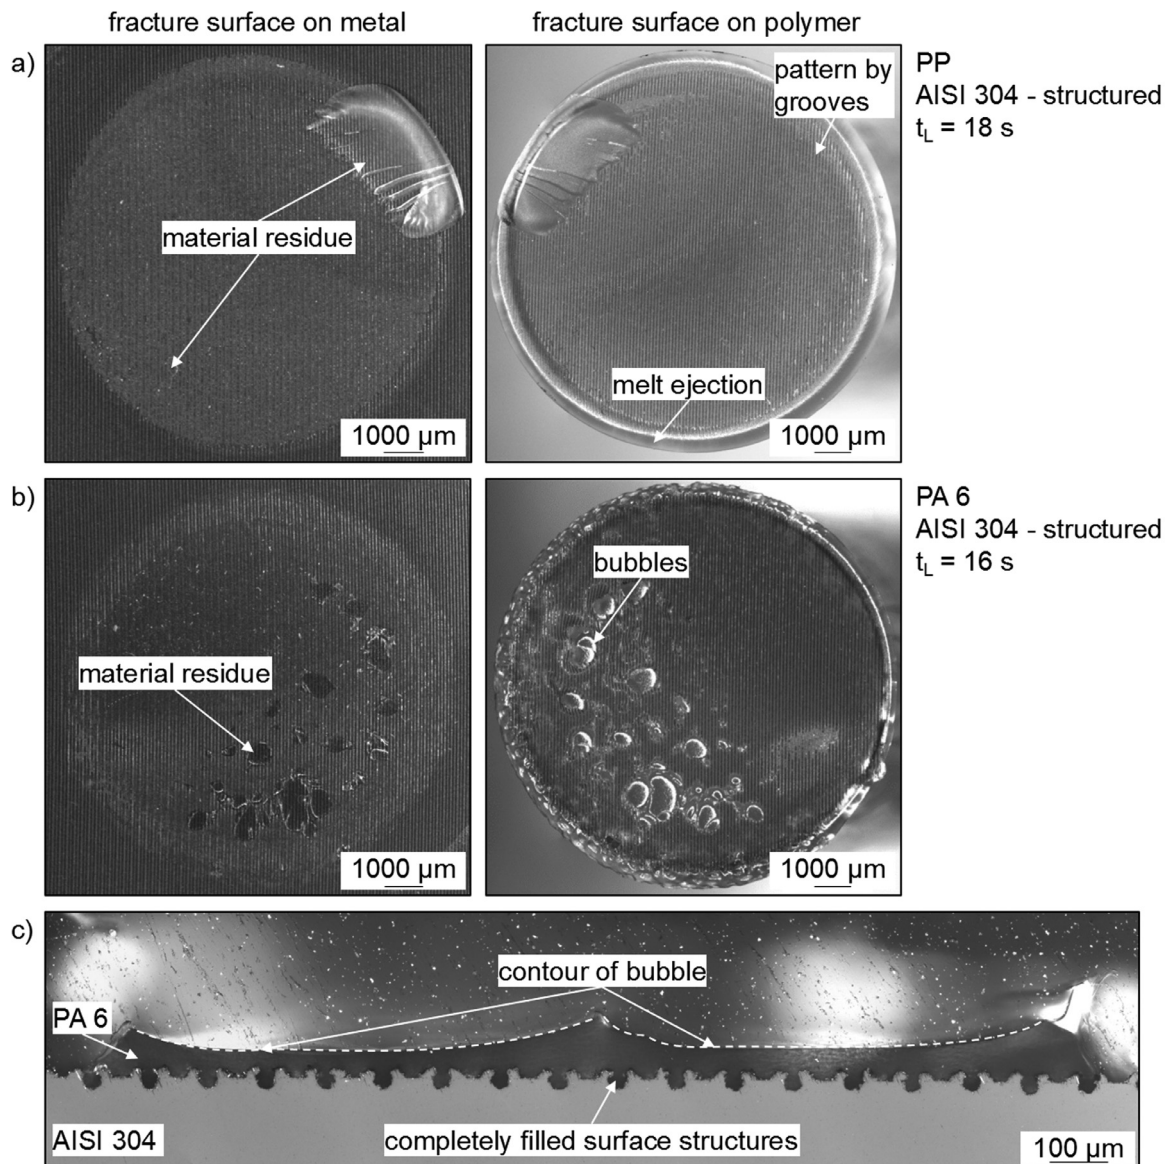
Fracture surface on metal and polymer after tensile test for structured AISI 304 with PP (a), PA 6 (b). Microsection of fracture surface with material residue under bubbles (c).
